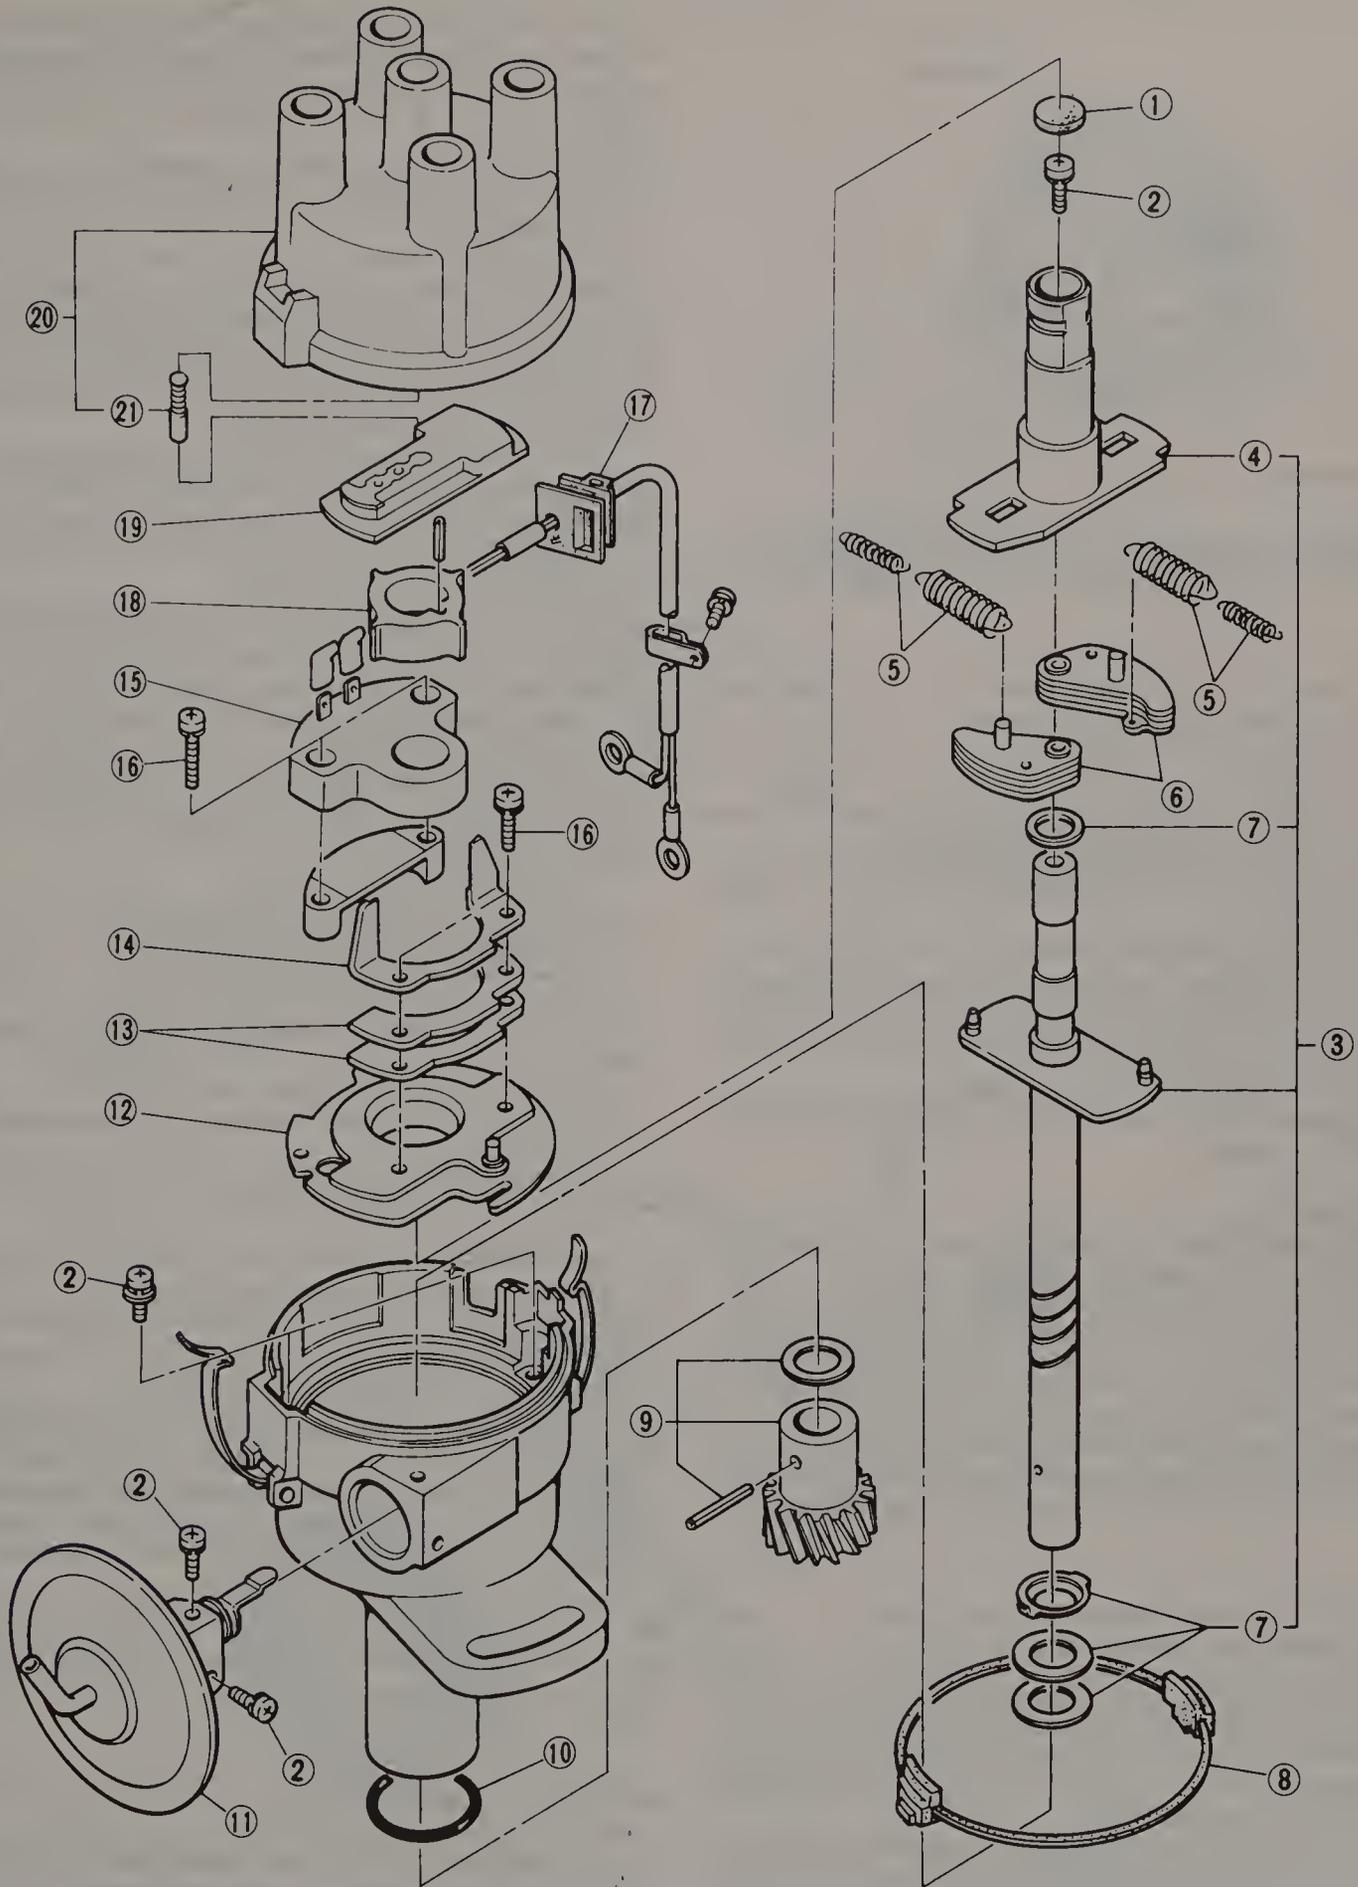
Distributor components (electronic – late Hitachi) – exploded view (Sec 13)
